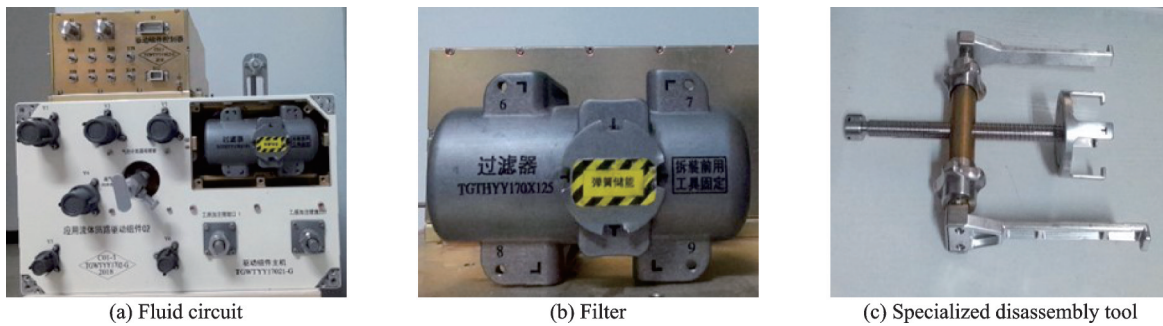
Fluid circuit, filter and the specialized disassembly tool
